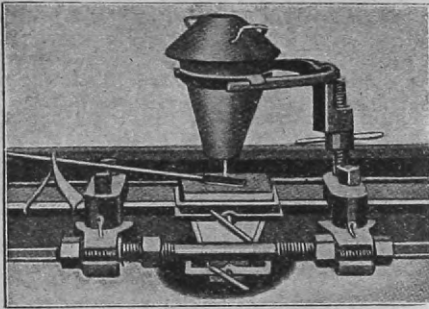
OUTFIT FOR WELDING RAILS BY THERMIT.
